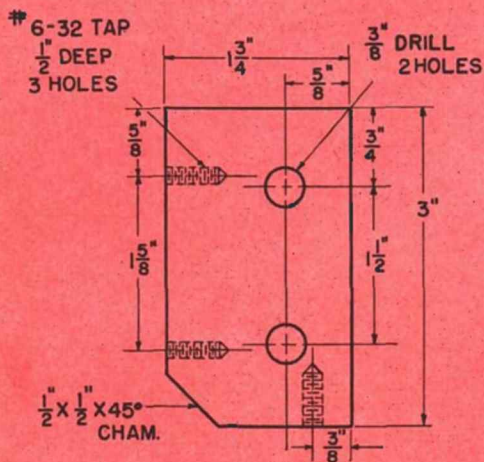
Bracket made from  $\frac{1}{4}$ -inch-thick insulating board to hold the "FOCUS" and "INTENSITY" potentiometers next to the C-R tube neck. Mounting holes may be first drilled in the chassis, then marked on both brackets.
